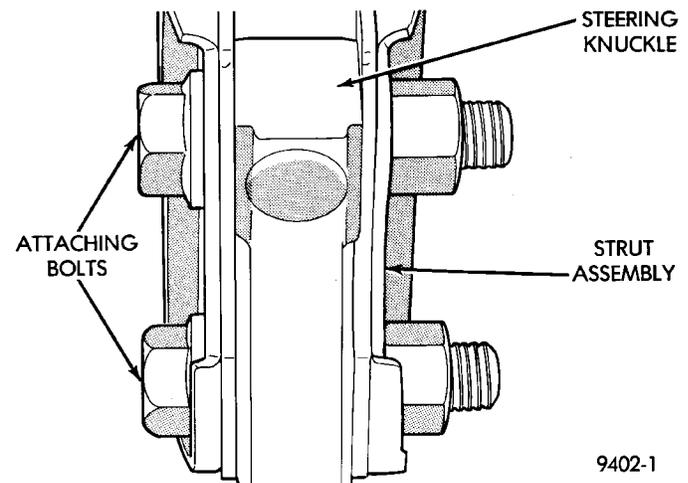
Remove Steering Knuckle To Strut Attaching Bolts
